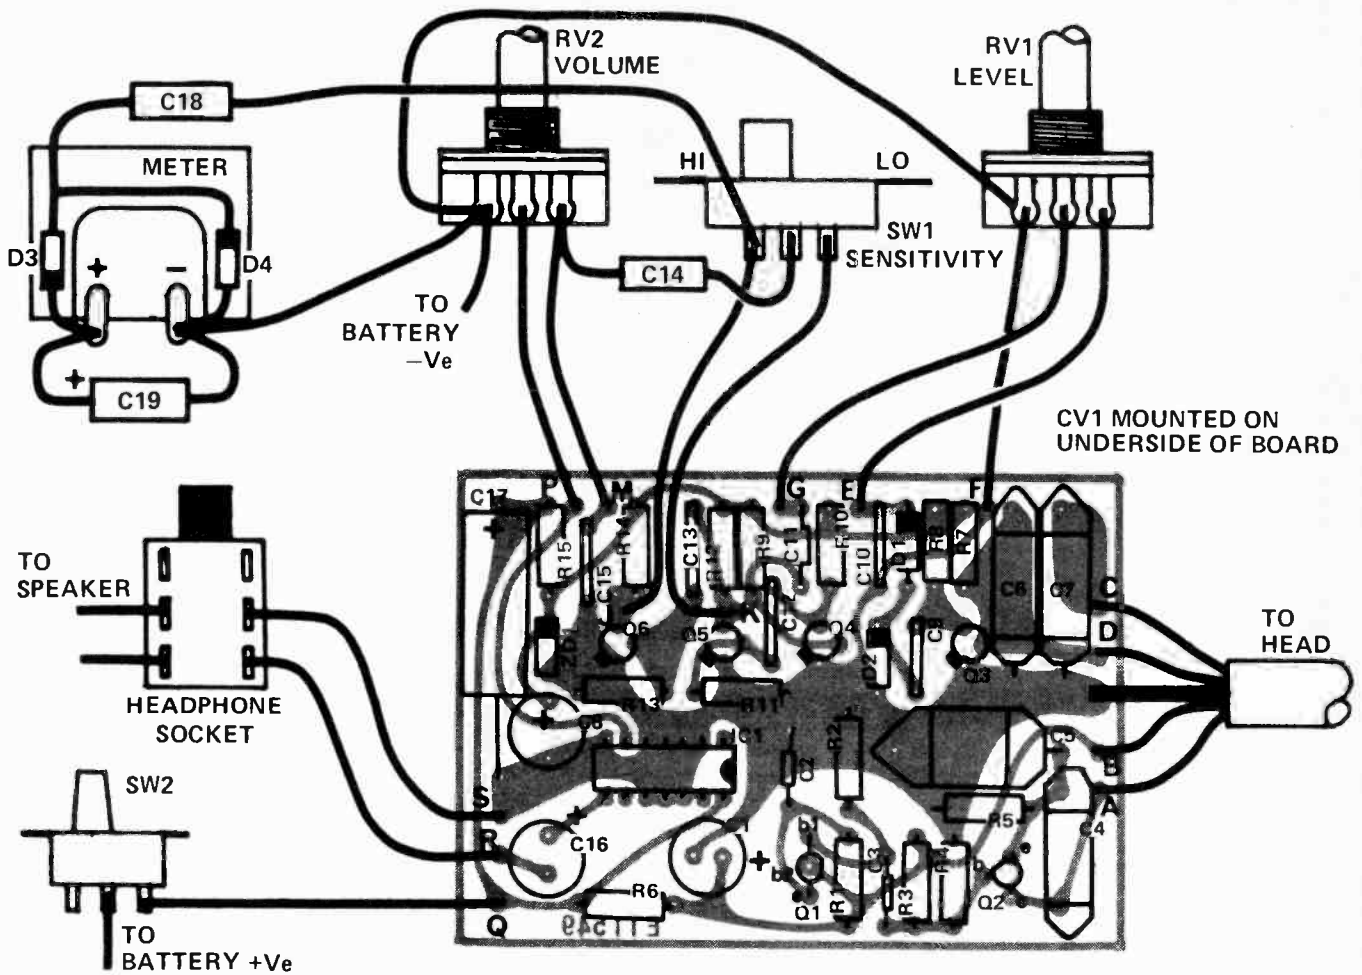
The component overlay and wiring diagram to other parts of the circuit not on the PCB.
